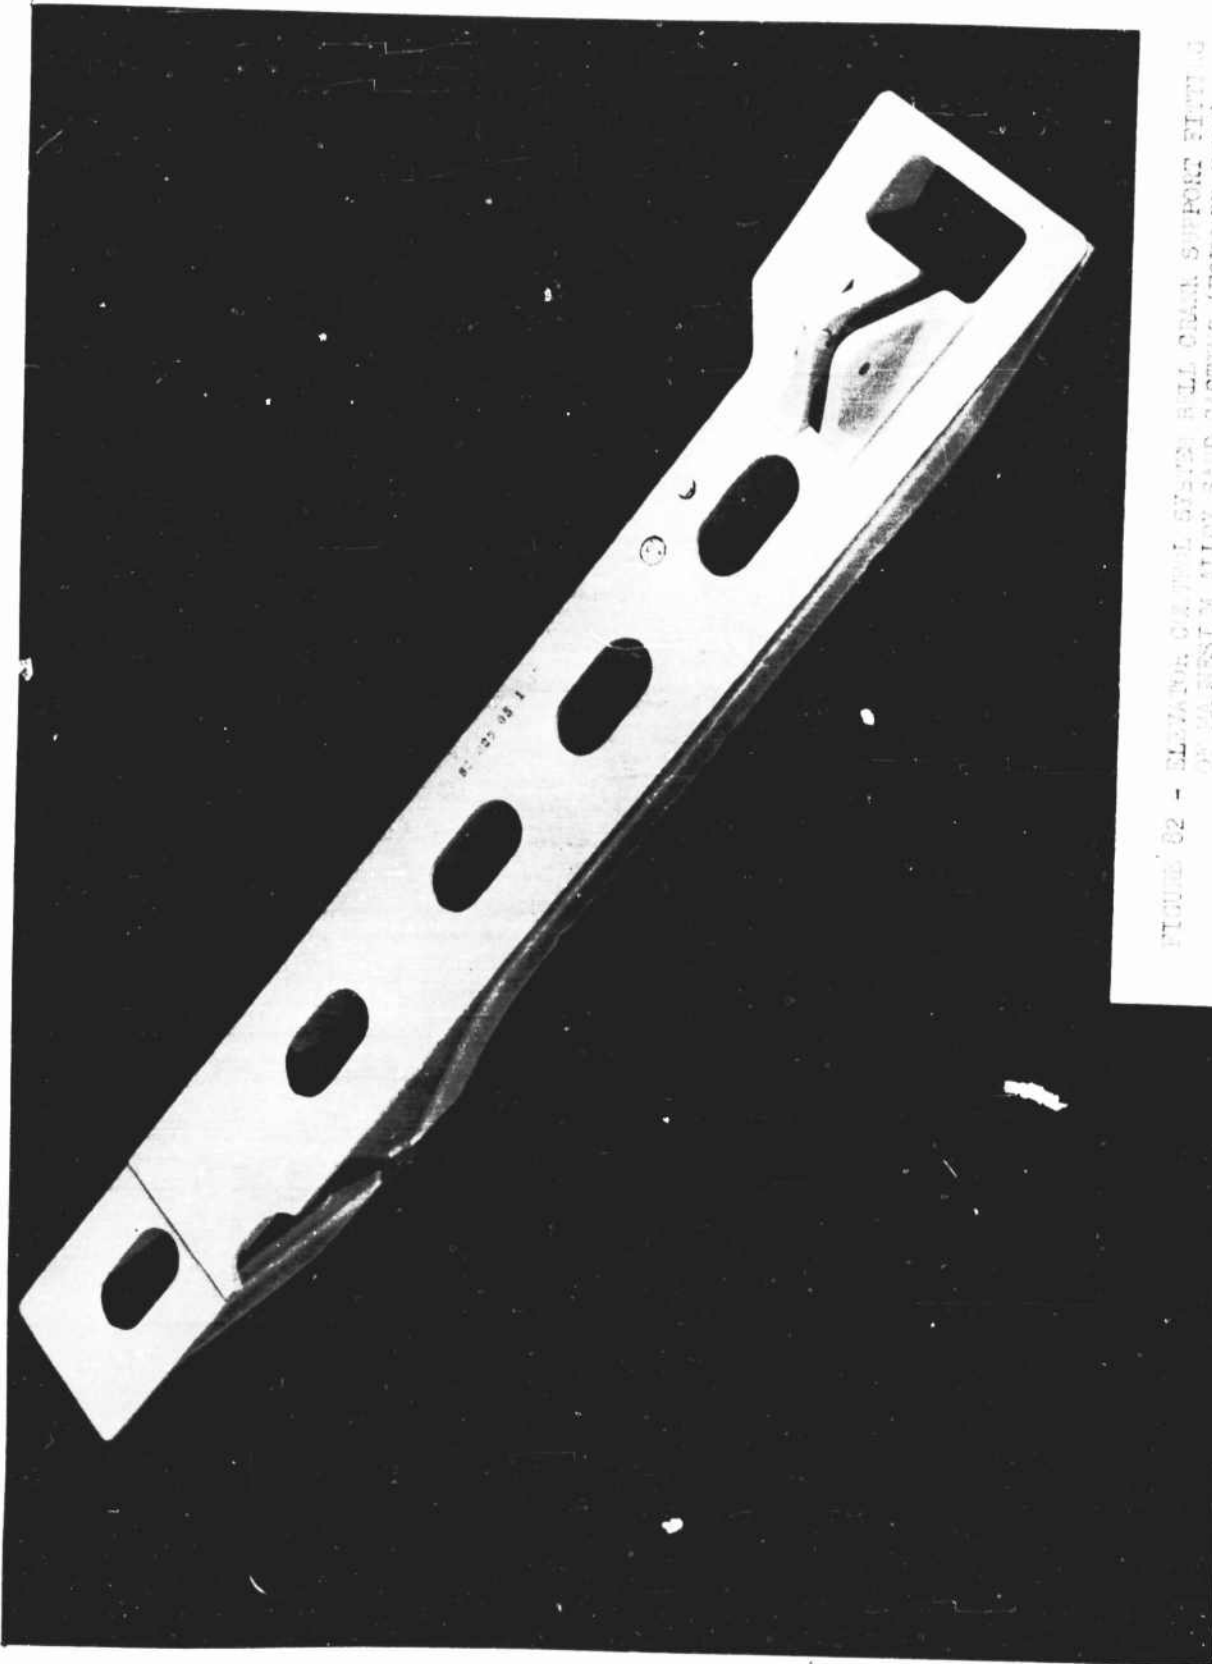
ELEVATION OF CASTING BELL CRANK SUPPORT FITTING
